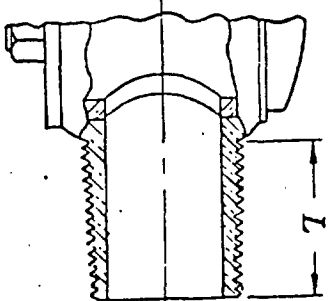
Standard Corporation Stop Thread Fig. 2. Fitting Thread for Use With Flared Copper Service Tubes, Type K
